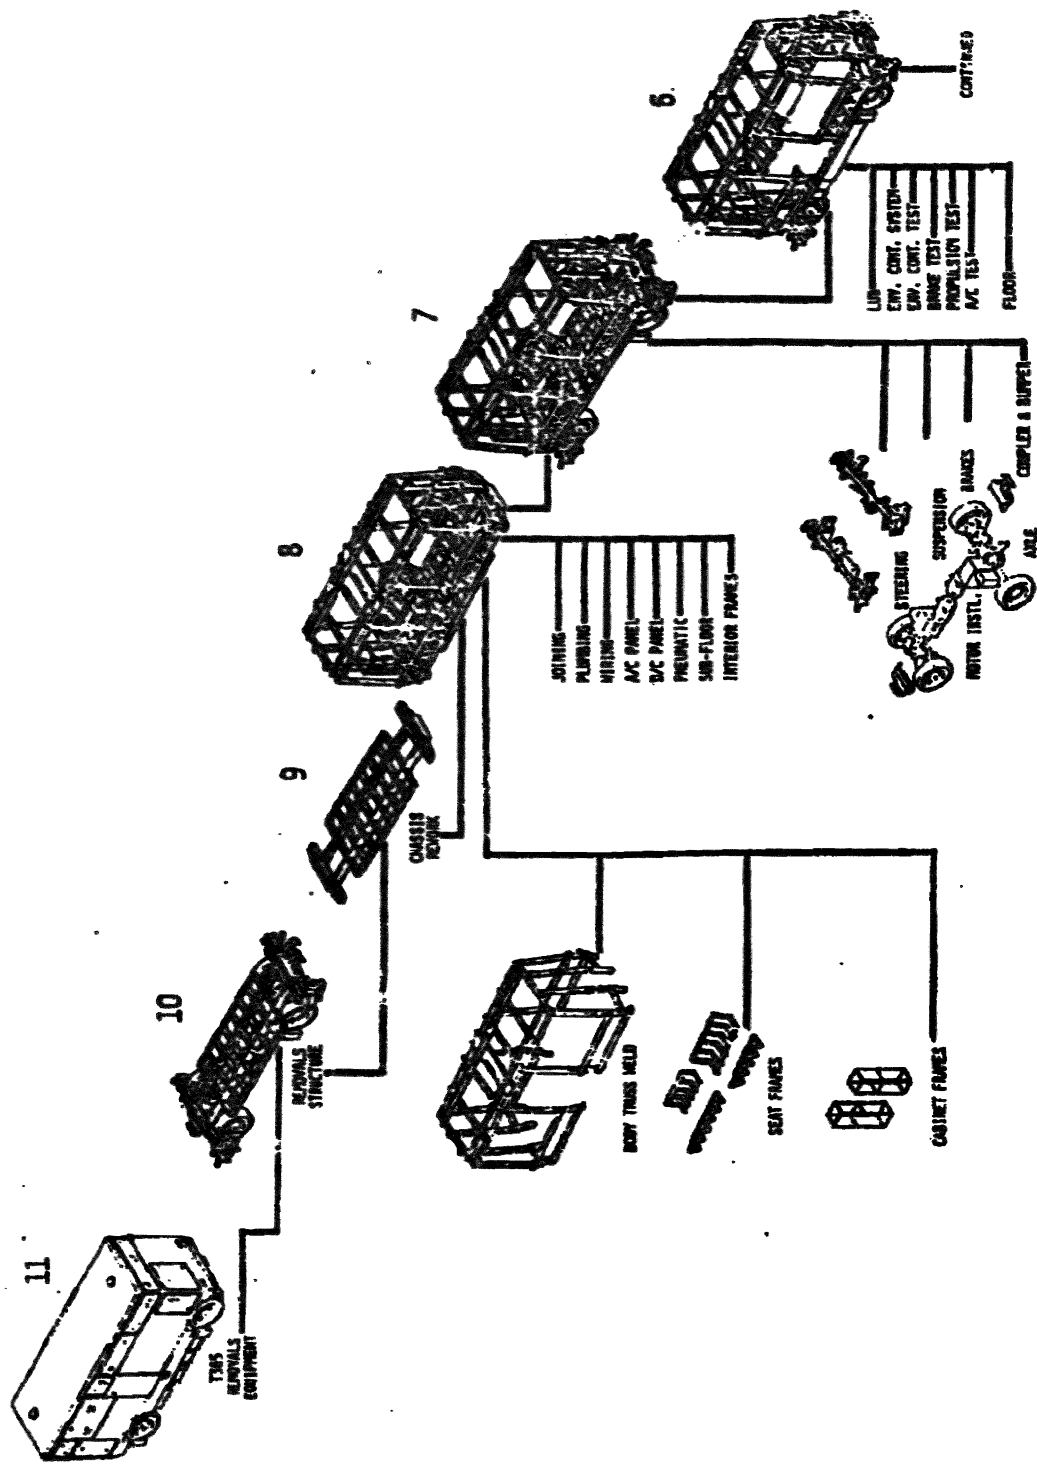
P40 PROTOTYPE VEHICLE ASSEMBLY
